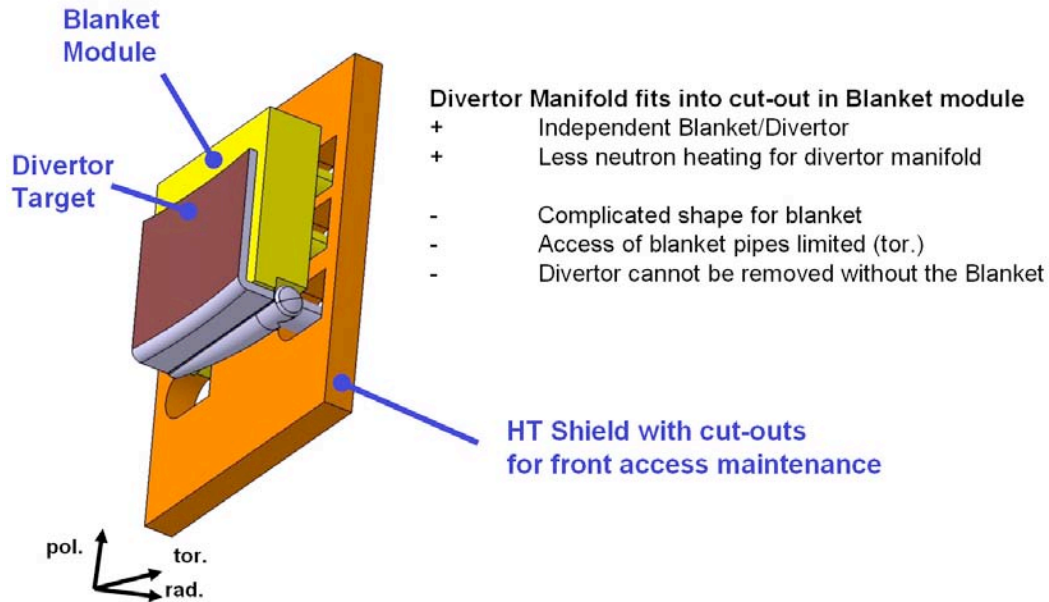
Divertor target in front of the blanket module, tapered divertor main manifold placed in a cut-out within a blanket box
